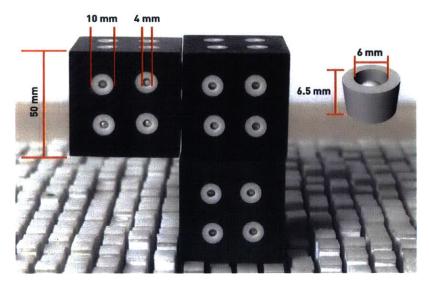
Locking blocks are made with spherical magnets inside a 3D printed plastic shell.
